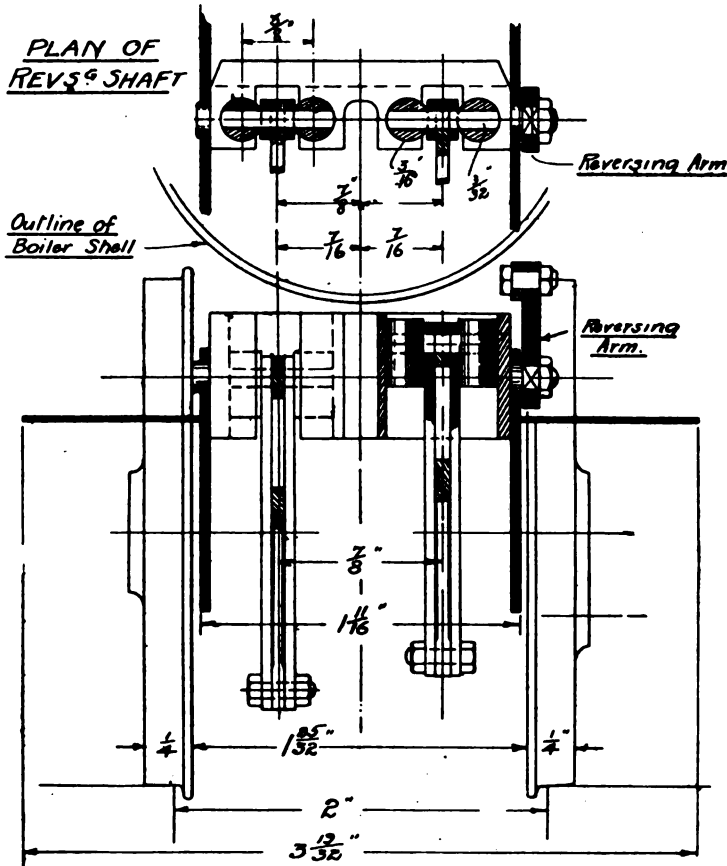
DETAILS OF NEW VALVE GEAR, AS APPLIED TO A 7-16THS IN. SCALE MODEL L.N.W.R. LOCOMOTIVE, "EXPERIMENT" CLASS.
